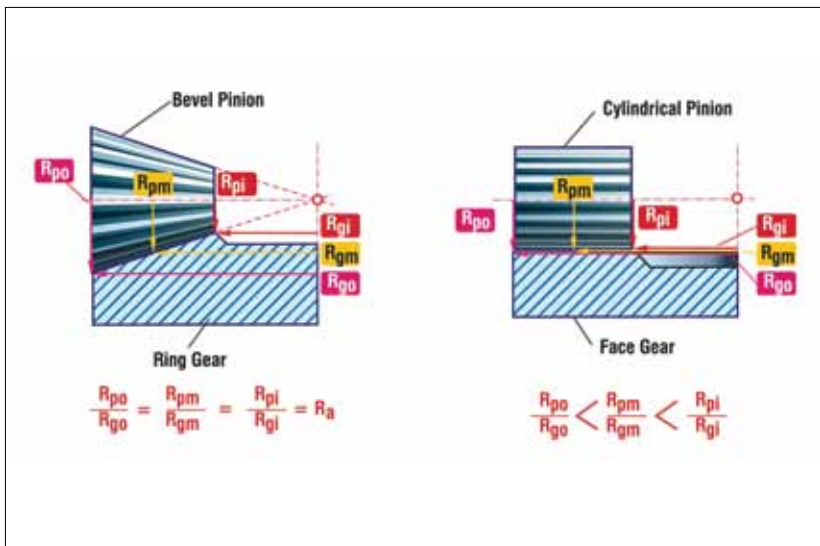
Radii discrepancy in face gears vs. bevel gears.
